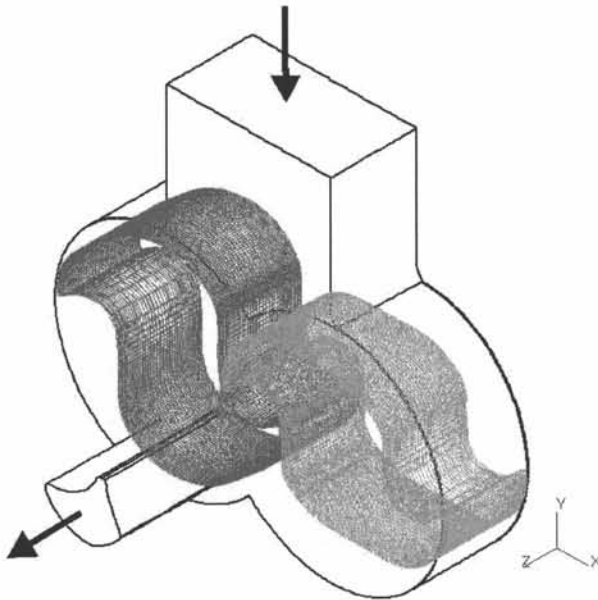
A typical tooth compressor geometry; inlet at the top and axial outlet
